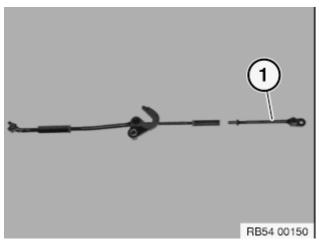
Removing Front Section Of Control Rod Courtesy of BMW OF NORTH AMERICA, INC.
